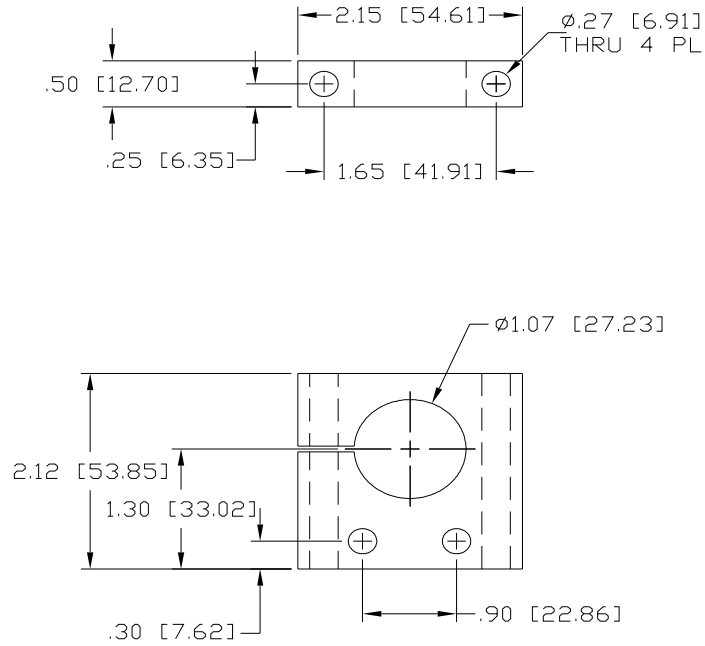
146824-AAAA Cylinder Pressure Cable
